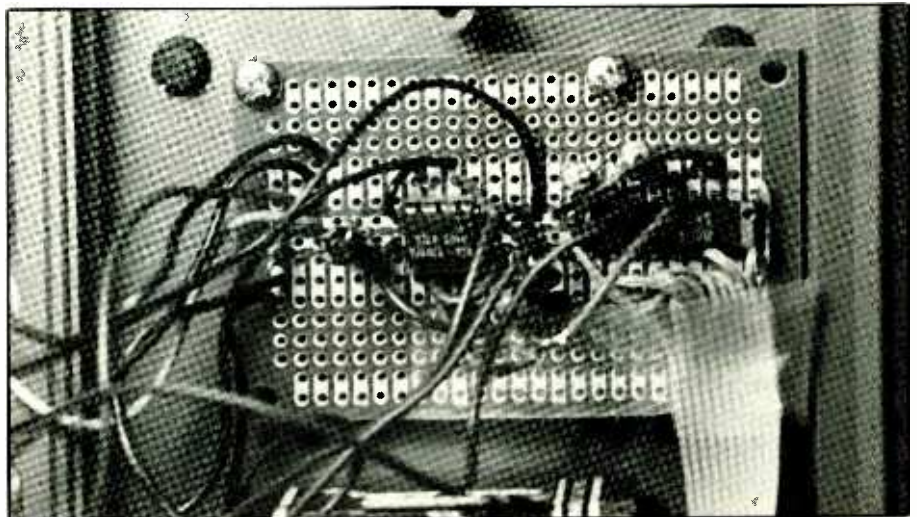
Author's prototype was wired on perforated board, using ribbon cable to interconnect to LEDs on top panel of enclosure.
